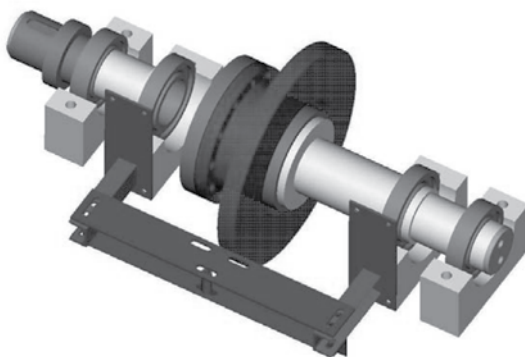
Shaft with brake disc supported on roller bearings and auxiliary frame
